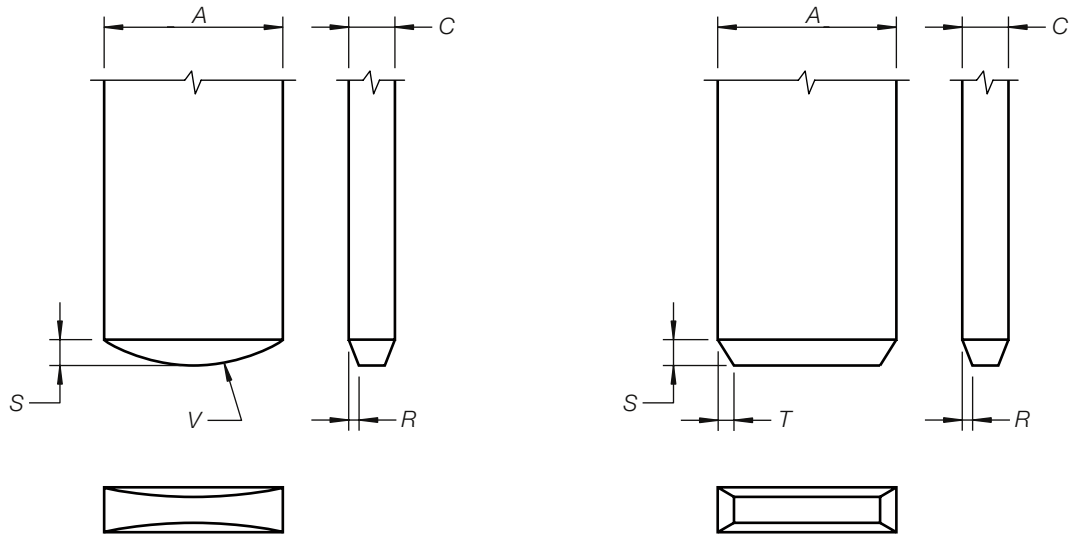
(in part) DIMENSIONS OF PLUGS
